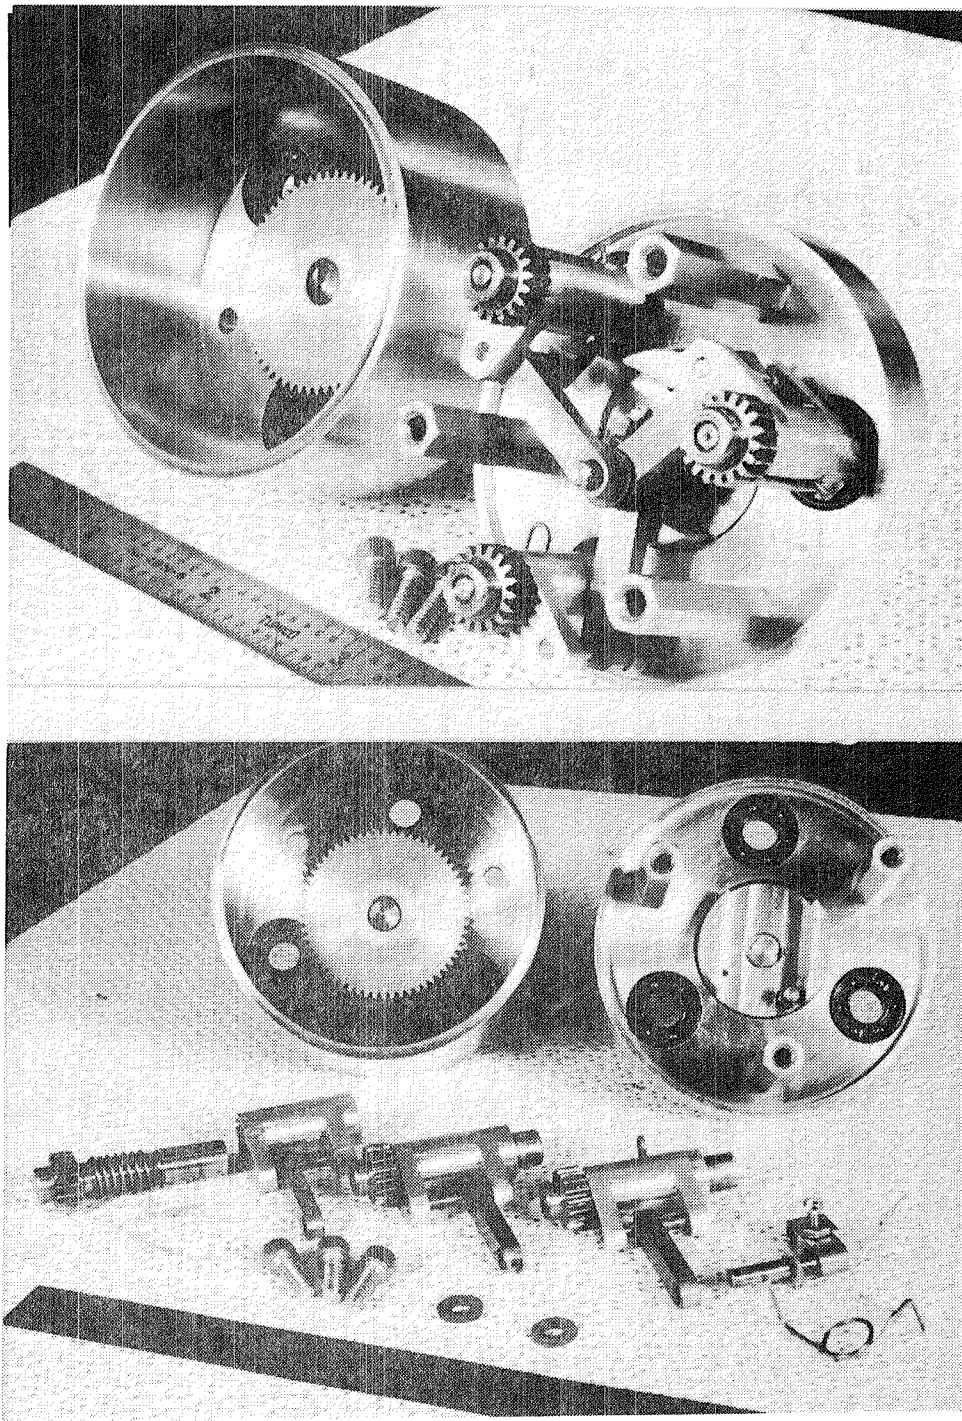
Photographs showing details of the inner components of Model 3NX. In both photos, the input half is on the right hand side. In the upper photo (a), the torque converter parts are still assembled. In the lower photo (b) they are exhibited. The torsion spring in lower right of (b) is the main return spring.
